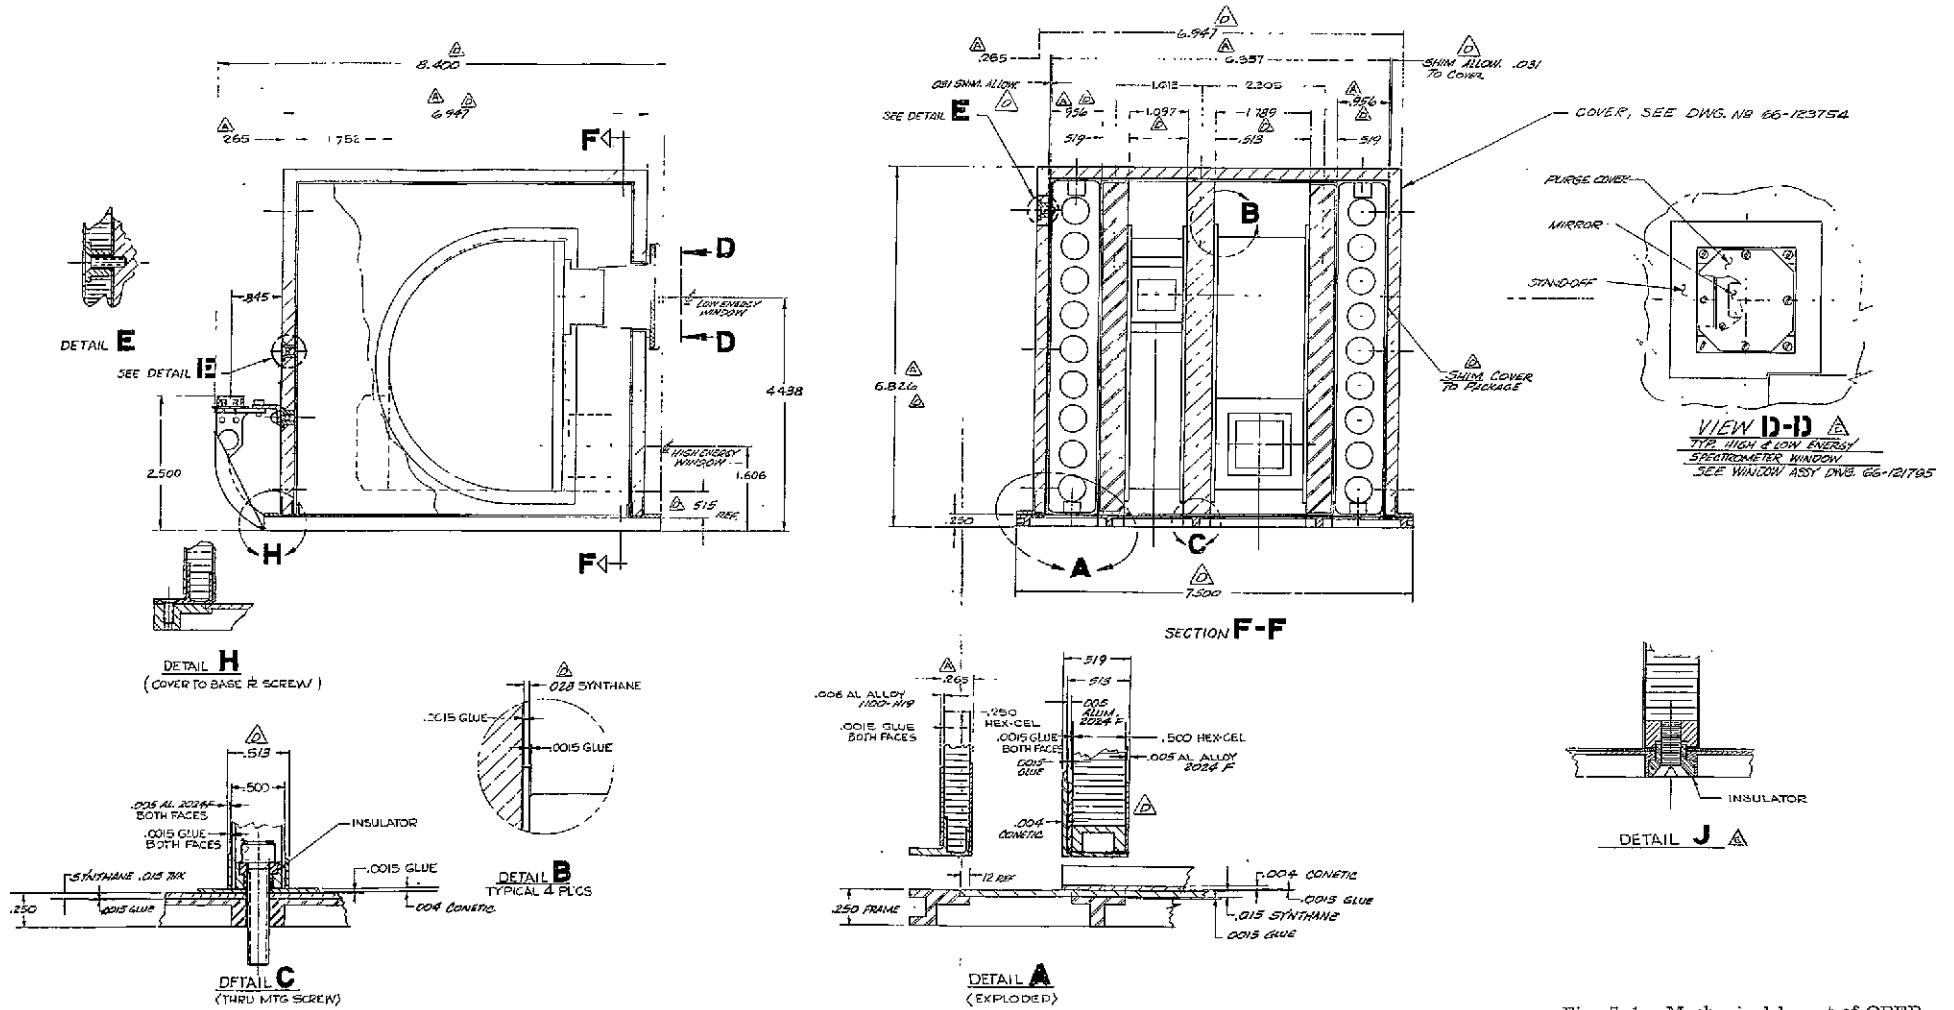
Mechanical layout of OPEP package (sheet 2 of 2).
